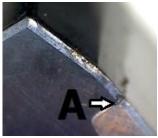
Crater wear and thermal influence on solder after sixth machined section (CNGX 1204L025-18AXA grade 7025).
